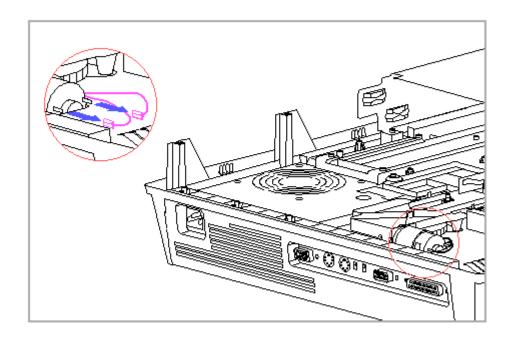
Disconnecting the Motor Cables on the Docking Mechanism
